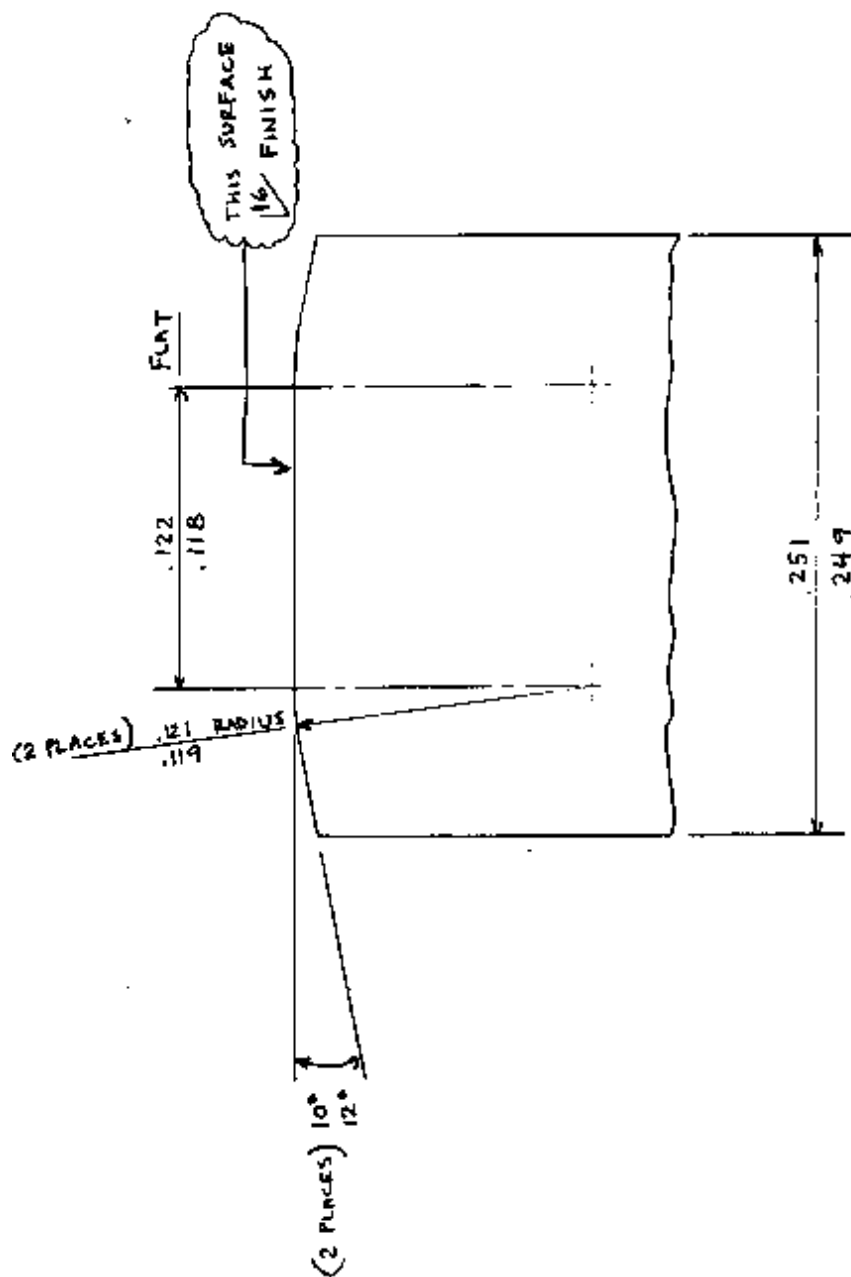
A.3. Fretting pad – 120 mil flat with chamfer (Dimensions in inches).
